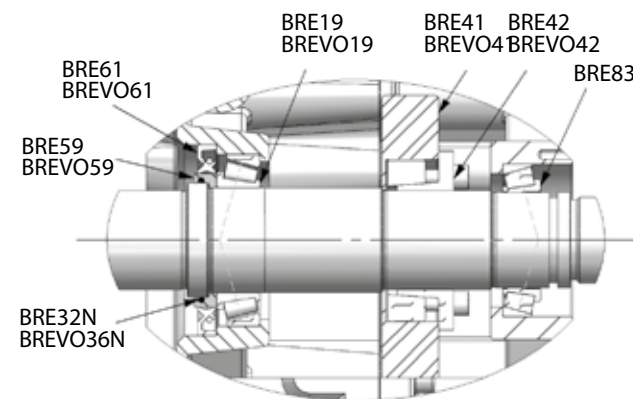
Detail of the assembly of the gearcase in step 2.
